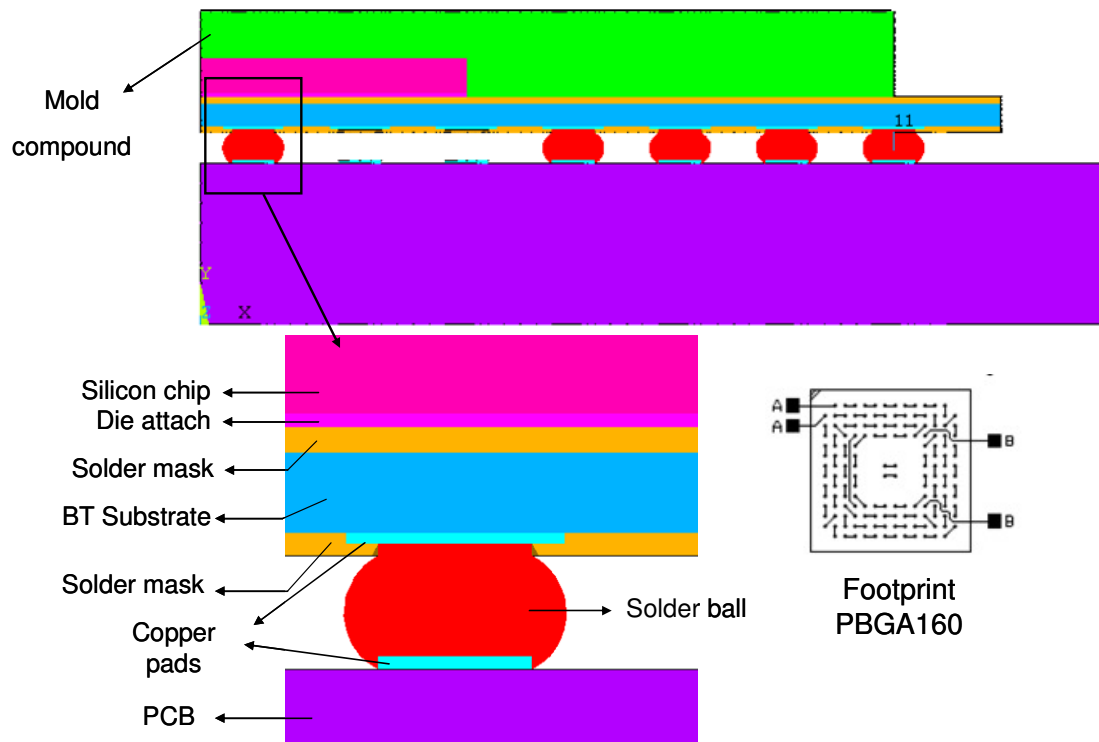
Cross-section along the centerline and footprint of the PBGA 160 package
